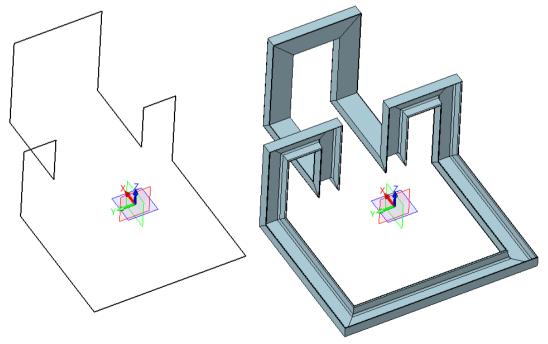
Wireframe modeling as a base for weldments (models made in ZW3D CAD/CAM)
